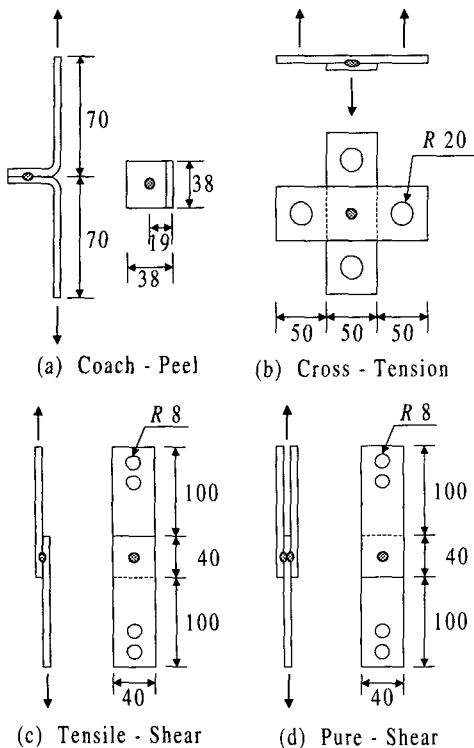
Geometries and loading modes of 4 types of spot welded specimens (unit : mm)
